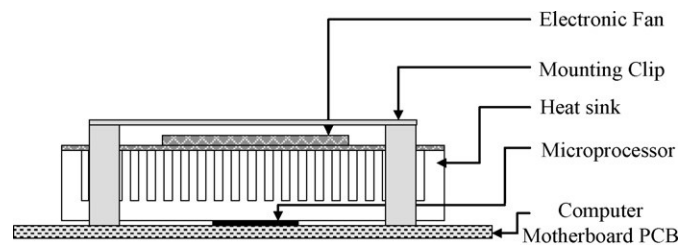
Schematic diagram of the standard heat sink and electronic fan assembly mounted onto the microprocessor.
